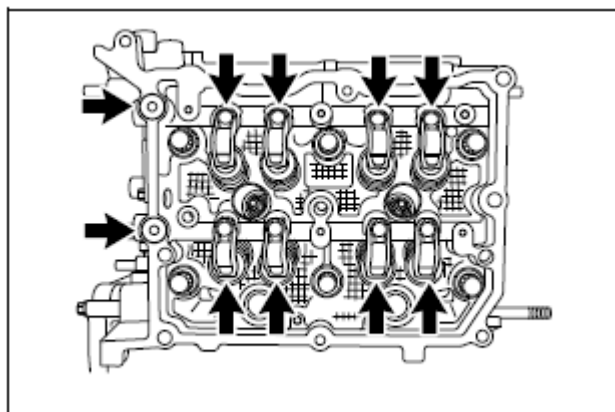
Identifying LH Cylinder Head Valve Rocker Arm Sub-Assembly No. 1 And O-Ring
